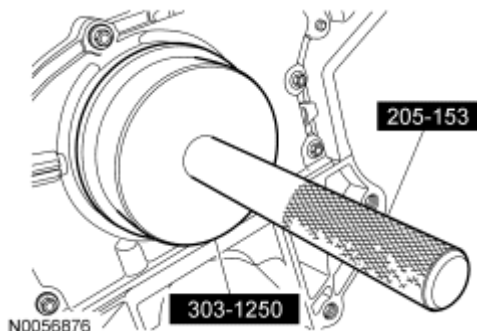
Installing New Crankshaft Rear Seal Using Special Tools (303-1250) & (205-153)
